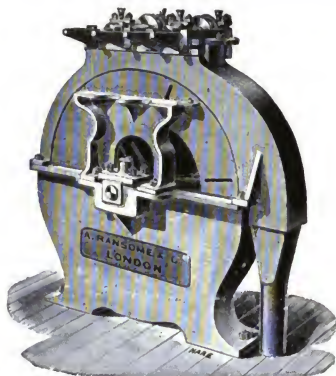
HEAD JOINTING AND DOWELLING MACHINE.
